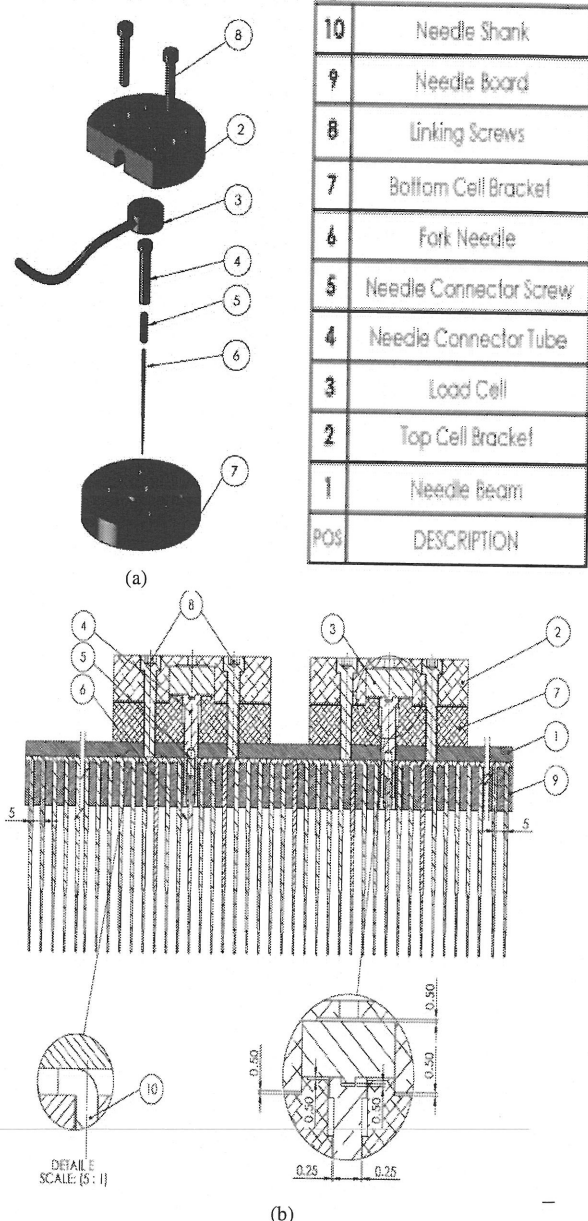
Force measuring unit, a) off-machine, b) on-machine.
